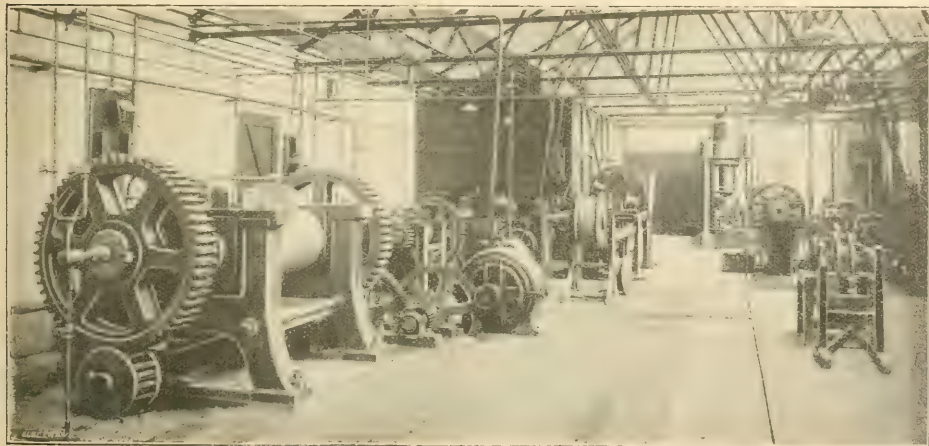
RUBBER MACHINES AND LEAD PRESS.
